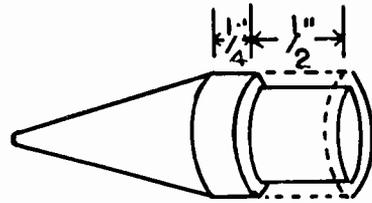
Step 1—Cut one-half inch off the unshaped end of the rod and then smoothly sand it to fit into one end of the hollow tube. Care must be taken so that it is a tight fit because only pressure holds the rod in the tube. However, do not force the rod into the tube or the tube will break.
